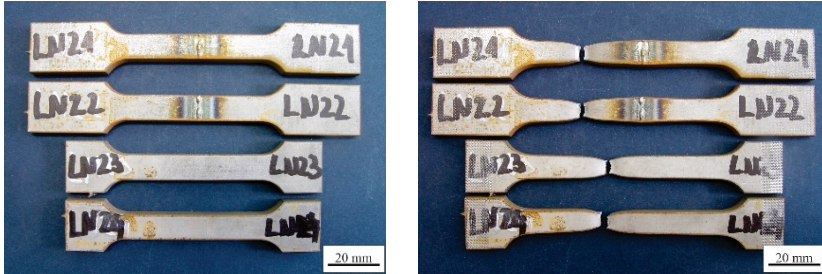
Tensile test specimens LN-2, welded with nitrogen and base metal: (a) before and (b) after the tensile test
